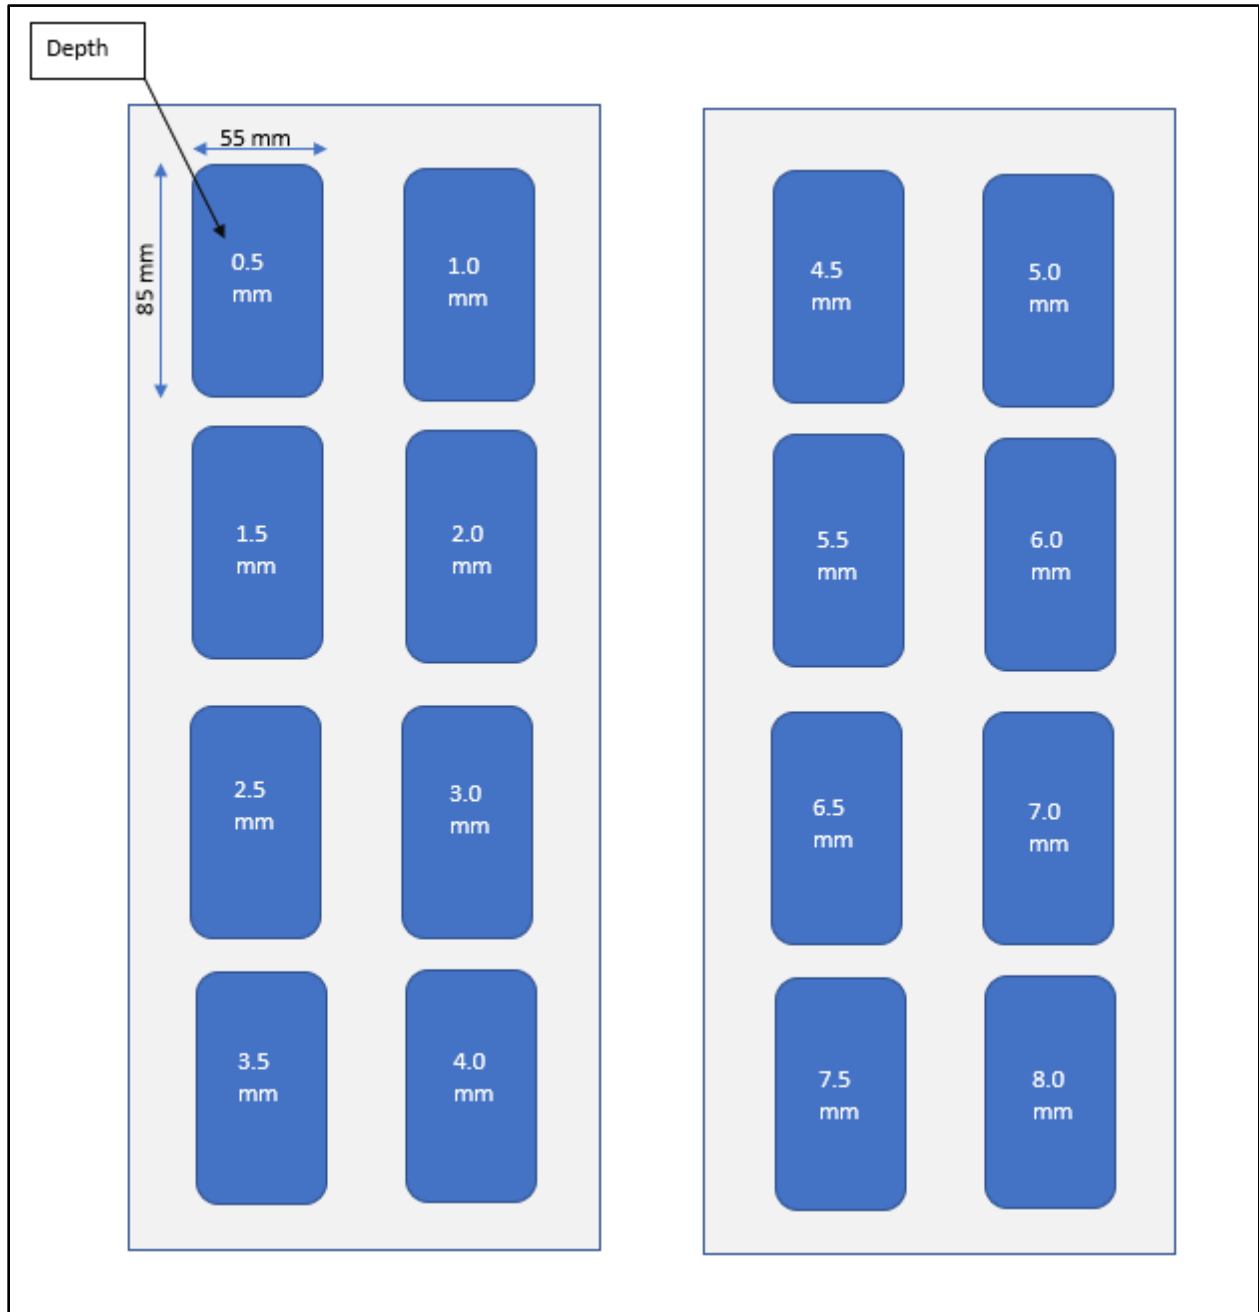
A schematic of the mold design that was sent to a third party for manufacturing. The thickness of each mold is given as the depth. The lateral dimensions measured 85 mm x 55 mm (shrinkage caused the actual specimen to be smaller in each dimension by 1 mm). The radius of the fillet and edges were 10 mm, which matched the radius of the first batch of TPR specimens.
